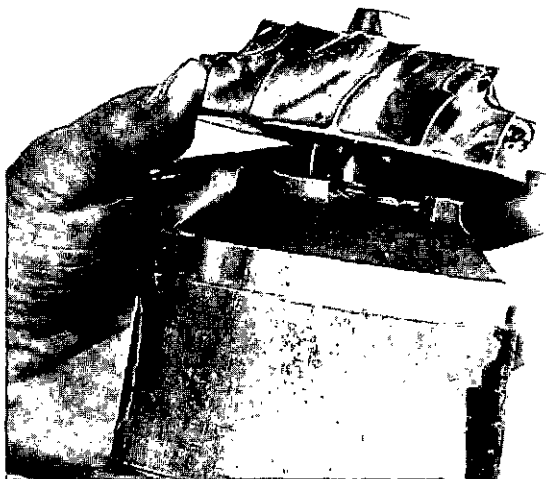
, (T3514). Installing the turbine wheel & shaft into the bearing housing
